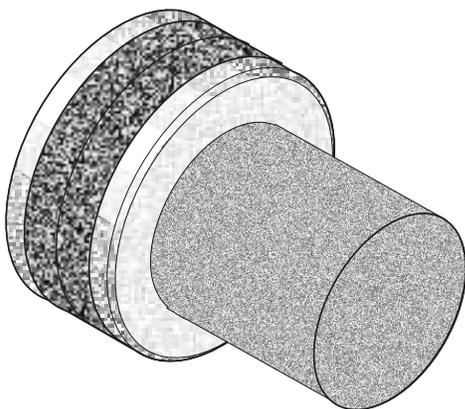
Cup-Type Diffusion/Dust Seal Assembly
